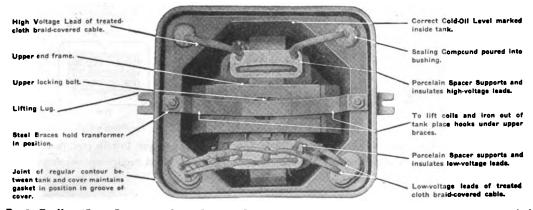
TOP VIEW (COVER REMOVED) OF SMALL-CAPACITY, STEEL-CLAD, TYPE S TRANSFORMER (A!! Parts Accessible for Inspection)
